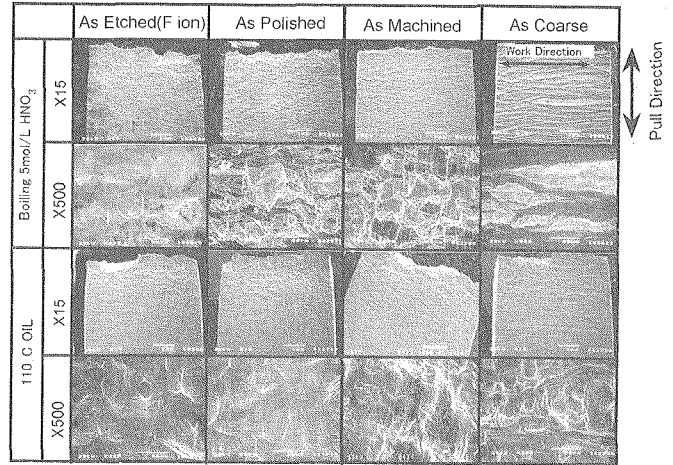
Difference in fracture surface morphology of specimens with various surface finish (Coriou corrosion tests)
